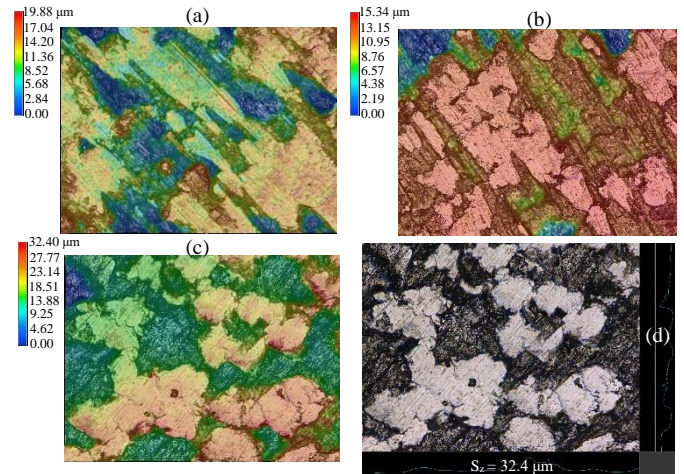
Surface topographies of machined surfaces at 60 m/min for (a) 8°; (b) 10°; (c) 12°; and (d) typical profile as seen through the microscope
